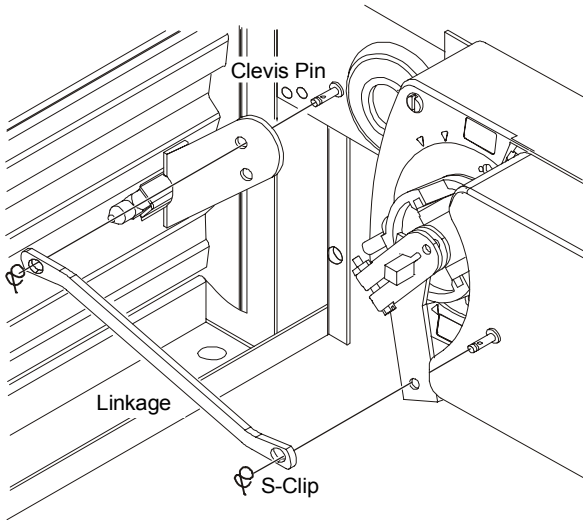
Installing Crank Arm, Right-Hand Downstream, Left-Hand Upstream
